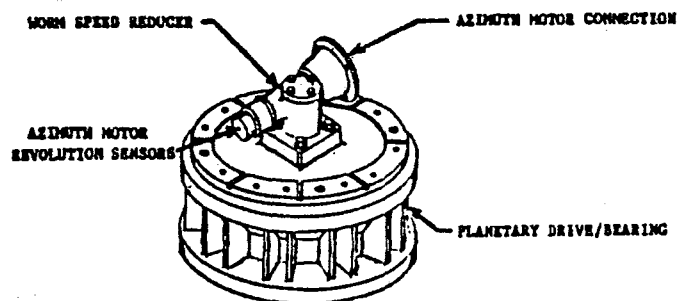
Azimuth Drive/Bearing Assembly
